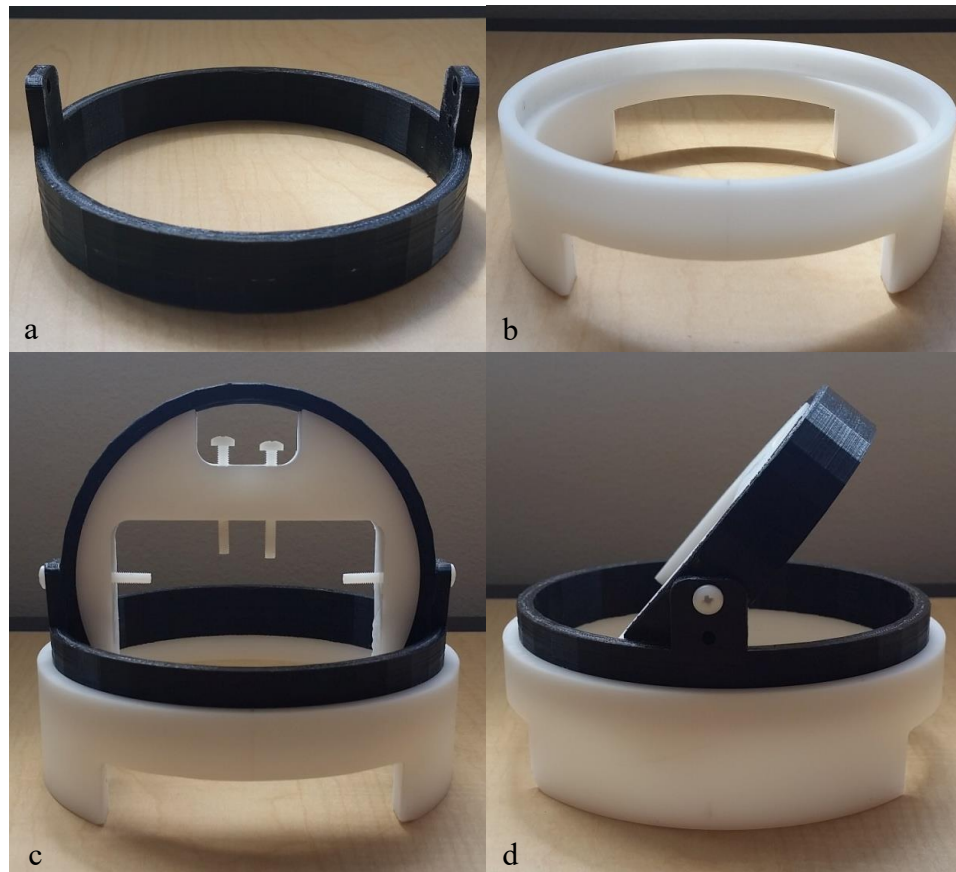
Rings and clamps assembly: (a) Axial rotating ring, (b) Top base ring, (c) Front view of rings and clamp assembly, (d) Side view of rings and clamp assembly.
